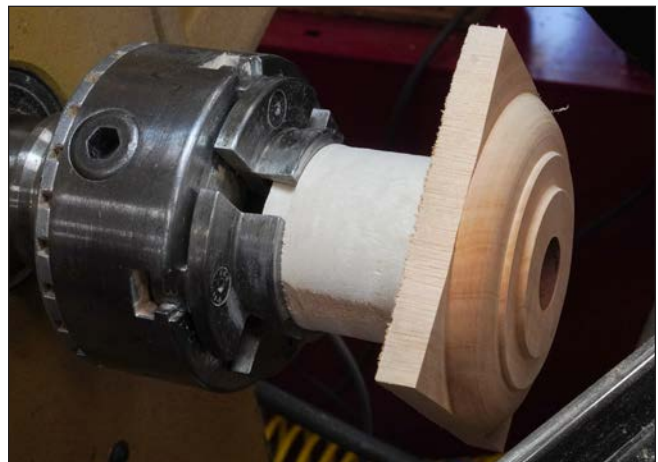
Sand and seal the base after shaping, while access to these surfaces is at its best.
